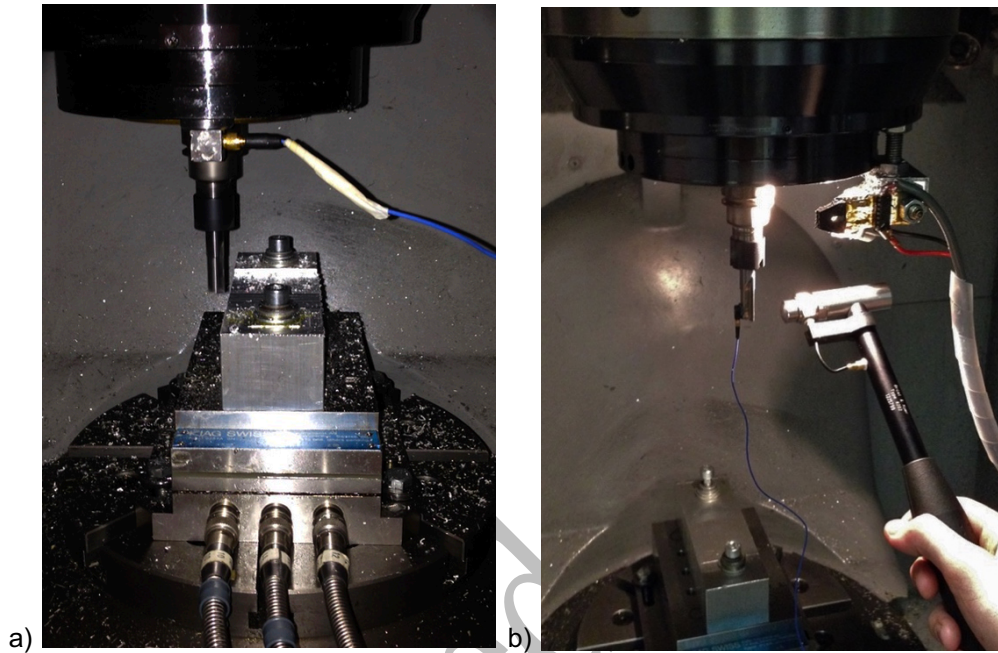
a) Cutting tests setup, b) Tooling impact testing.
